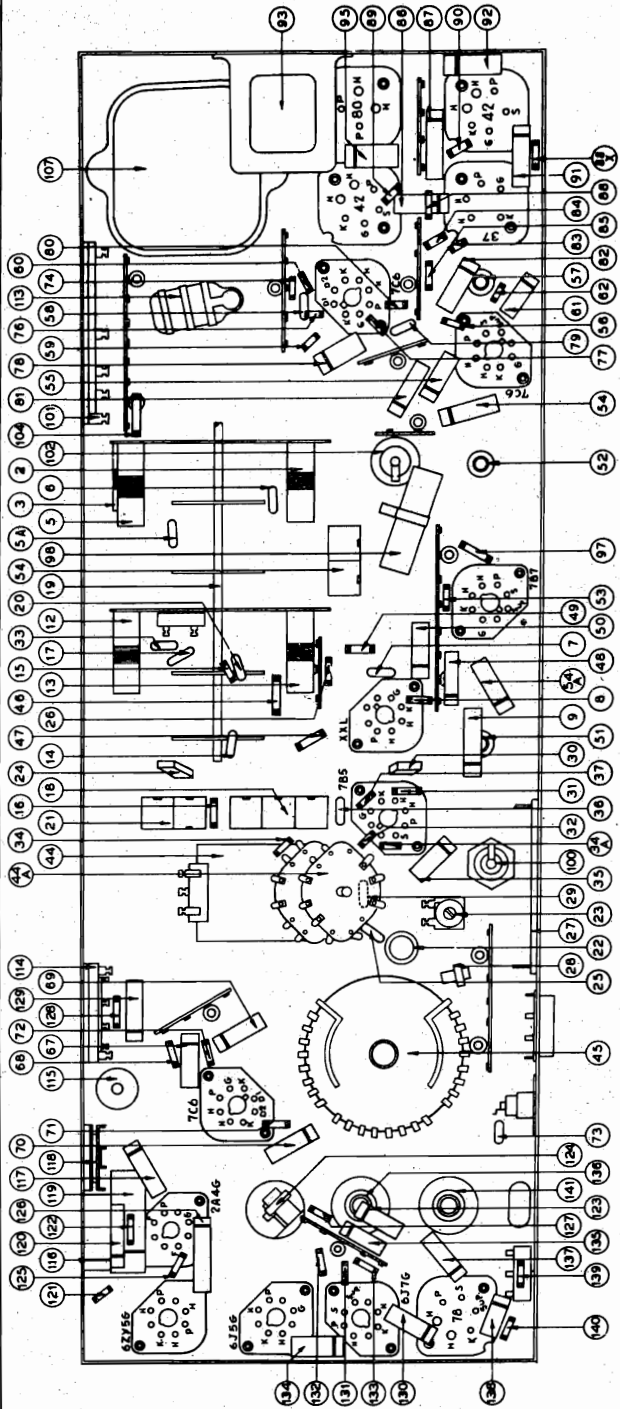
PART LOCATIONS - UNDERSIDE OF CHASSIS
